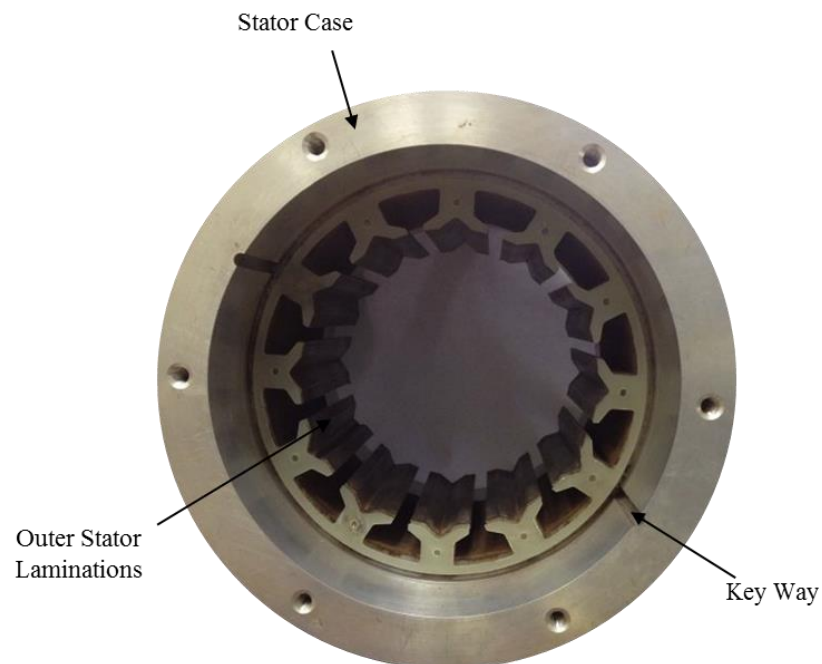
Final Constructed Outer Stator Inside the Case.
